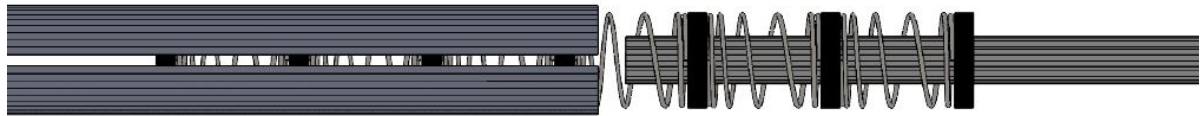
Exploded view of flexible shaft. From left to right: the outer wire ropes, the magnets and compression spring, the inner wire ropes.
